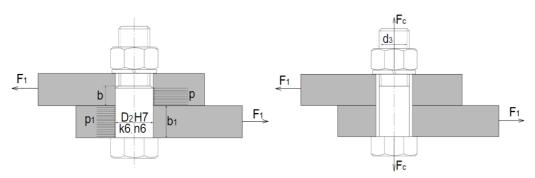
a) Fitted bolted joint; b) Clamped bolted joint
